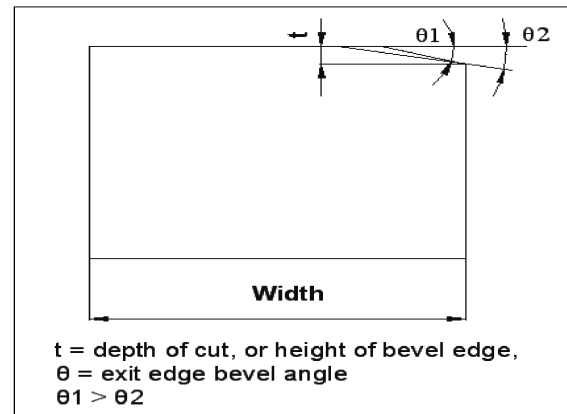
Schematic diagram of workpiece which indicates exit edge bevel
